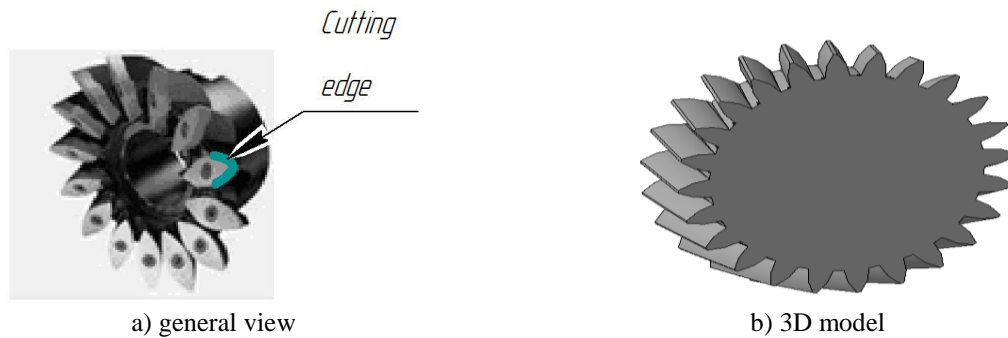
Typical assembled cutter with mechanical clamping for the Power skiving method
